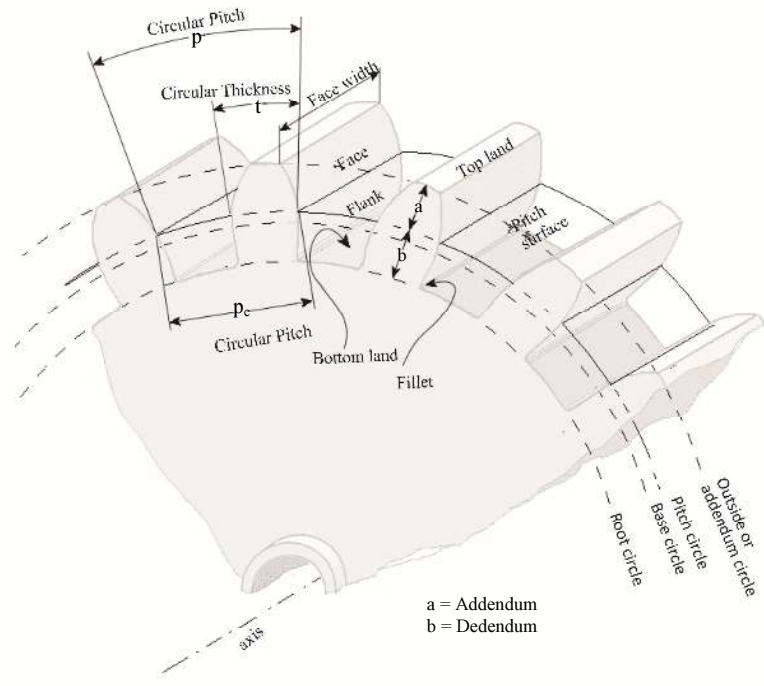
The geometrical elements of a straight toothed gear; head, root and division circles; circular step
